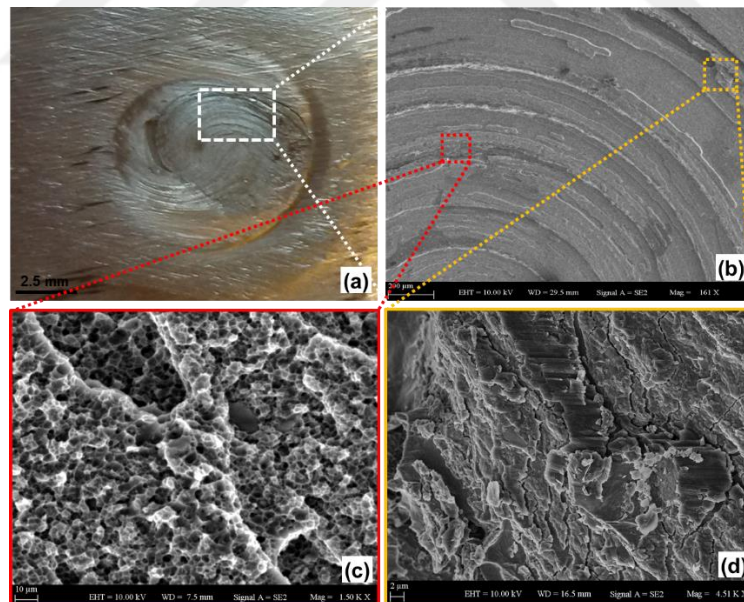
Fracture surface after the shear-tensile test of Al 2024 welded sample in (a) T3 and (b) O tempers
